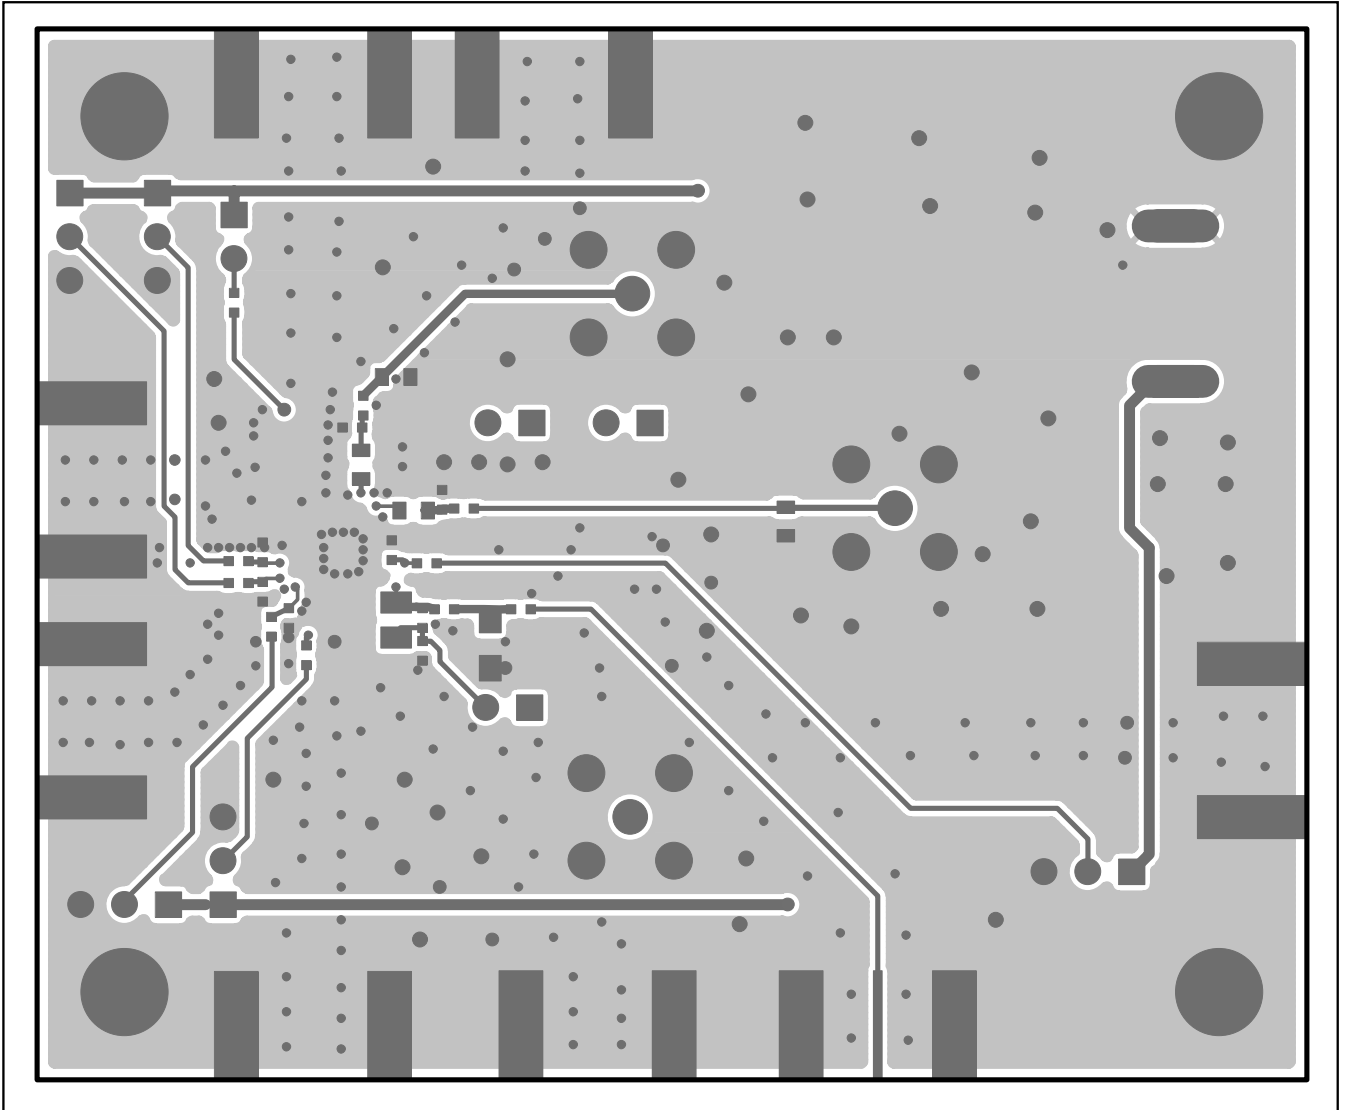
MAX2335 EV Kit PC Board Layout—Back Side
